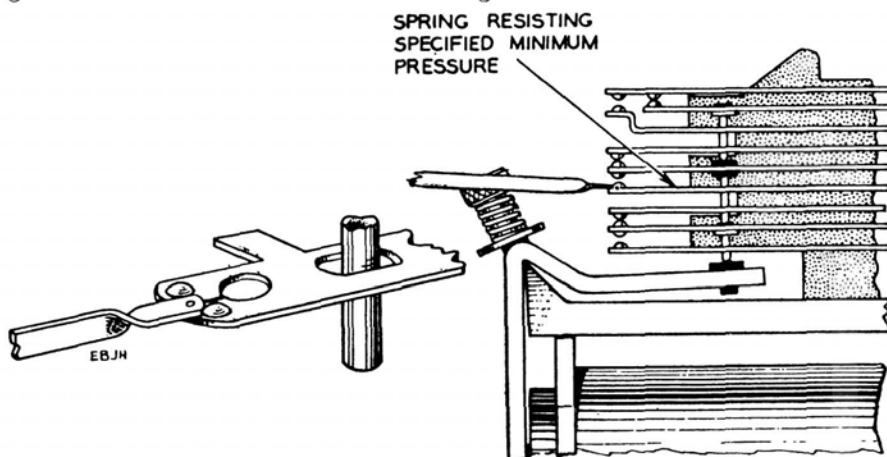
CHECKING MINIMUM BLOCK PRESSURE
